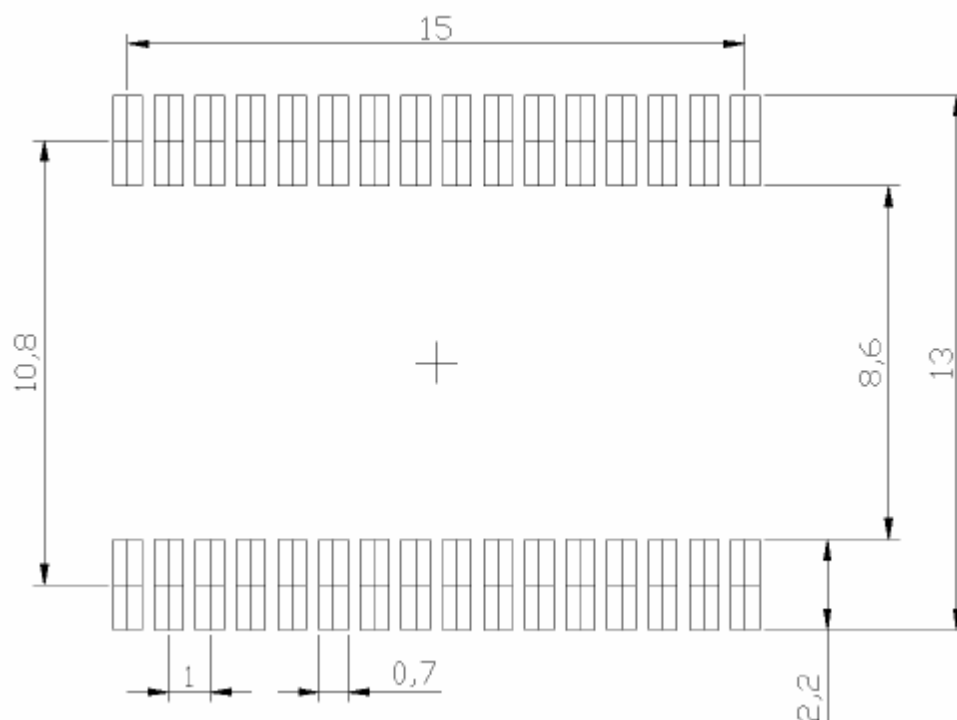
Recommended PWB pad layout for SCHA63T-K03.
